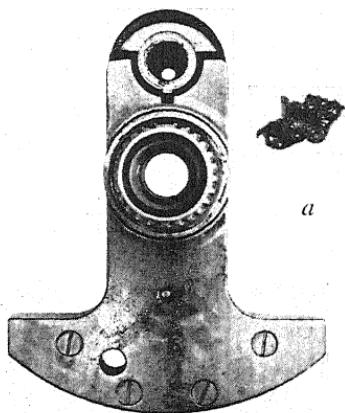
Crankshaft (from the Same Engine as Fig. 1) showing the Small Sludge Deposit(a)
